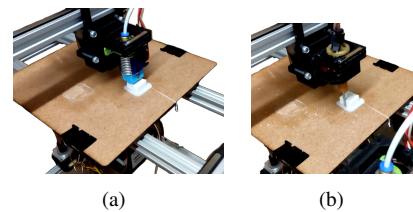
(a) Three-dimensional printing process; (b) Machining process.
